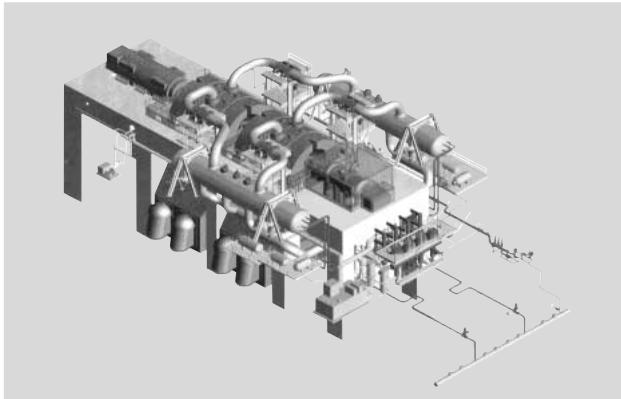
3-D CAD Model of Steam-Turbine Equipment.
